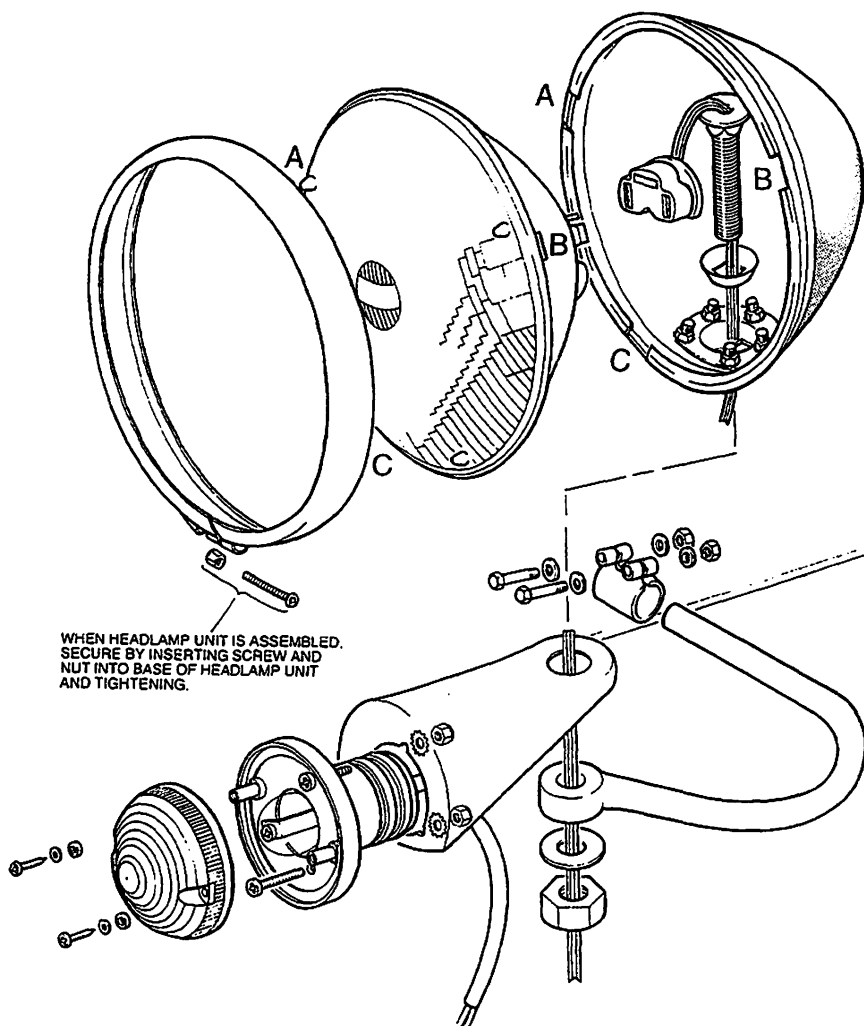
A Headlamp and Indicator Fitment - Cycle Wing Cars
